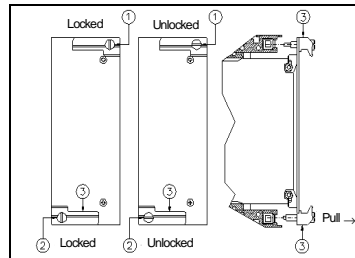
Latch Mechanism for Removal of Relay from Case
